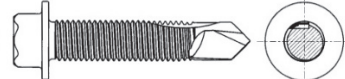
5/16-24 INDENTED HEX WASHER HEAD WITH SHANK SLOT (TYPE 12 SCREW)
